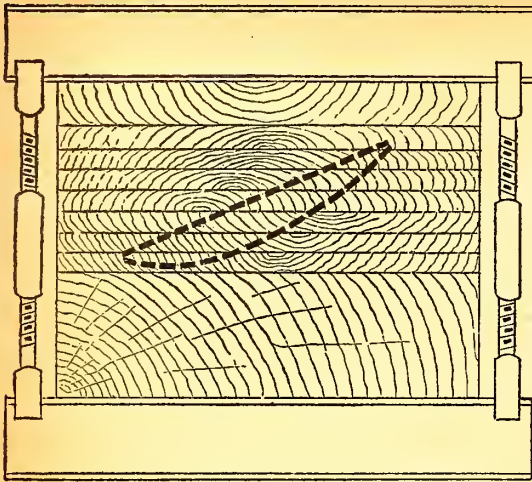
Note arrangement of boards to give edge grain on the faces of the propeller. The 2 in. board at the top should be crowned about 1/16 in. at the center to prevent excessive pressure at the edges, due to bending of the I beam when the clamps are tightened.
